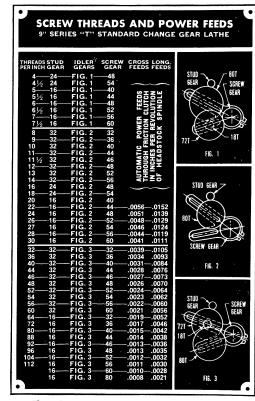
Index Chart Showing Threads and Feeds on 9-inch Standard Change Gear Lathe
